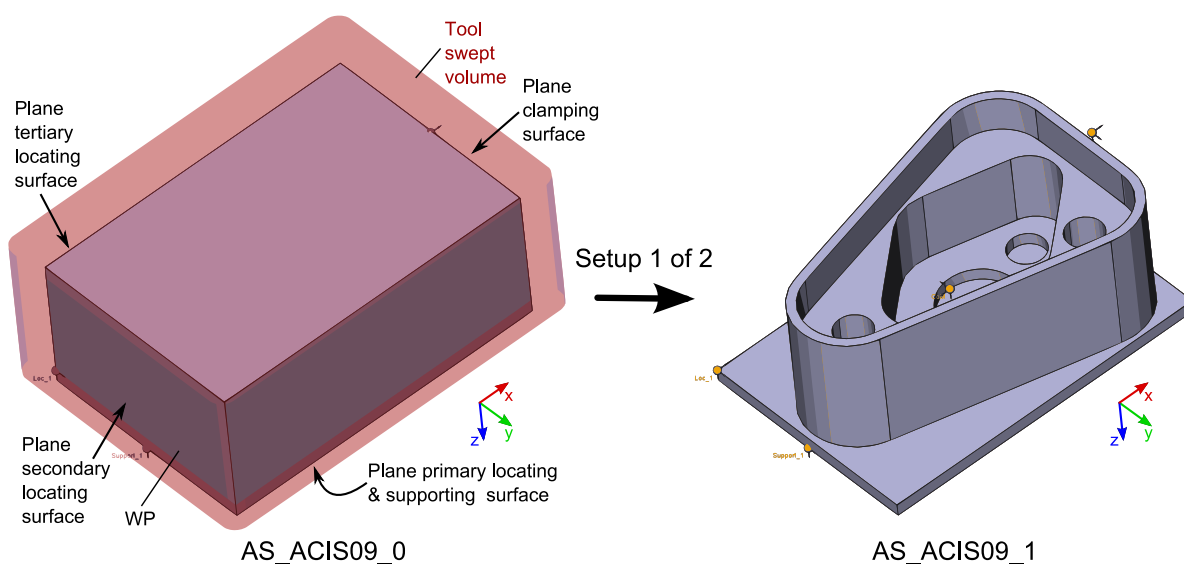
Setup 1 of 2 of workpiece AS_ACIS09; left side shows blank with tool swept volume obstacle and all plane contact surfaces; right side shows resulting workpiece after machining of the setup
